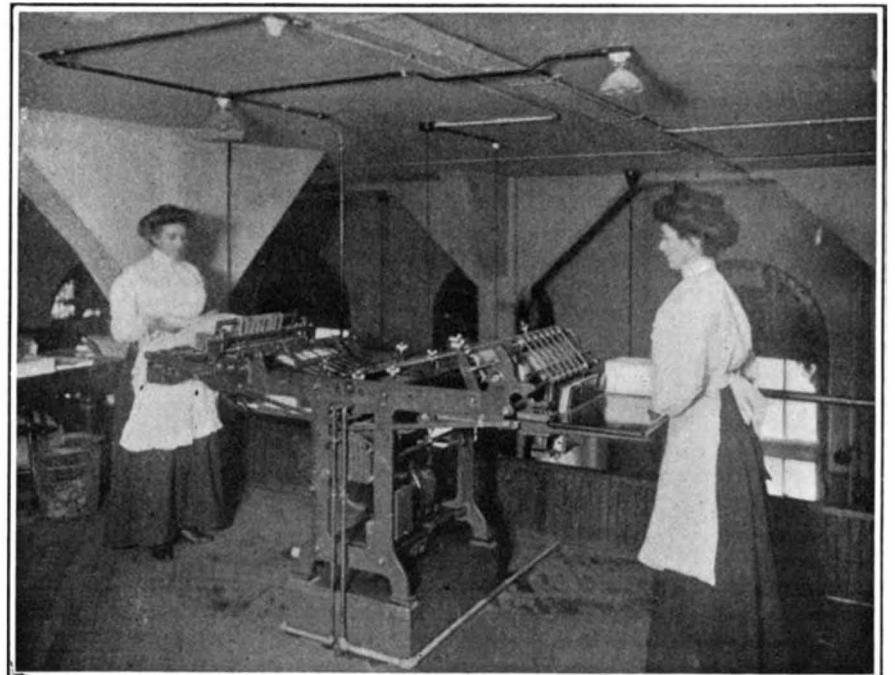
How the paper passes from the feeder of the dampening machine down into the water and how it is automatically stacked on edge.
